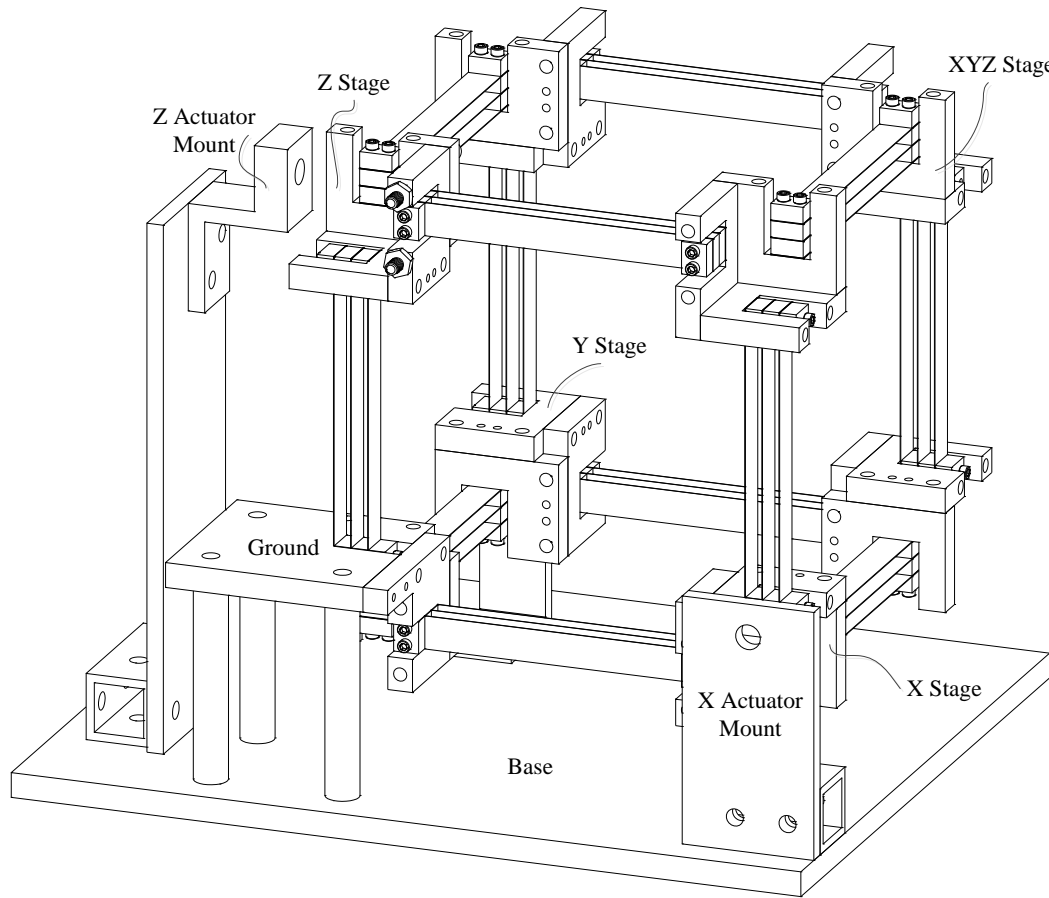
First XYZ Flexure Mechanism Prototype CAD Assembly
